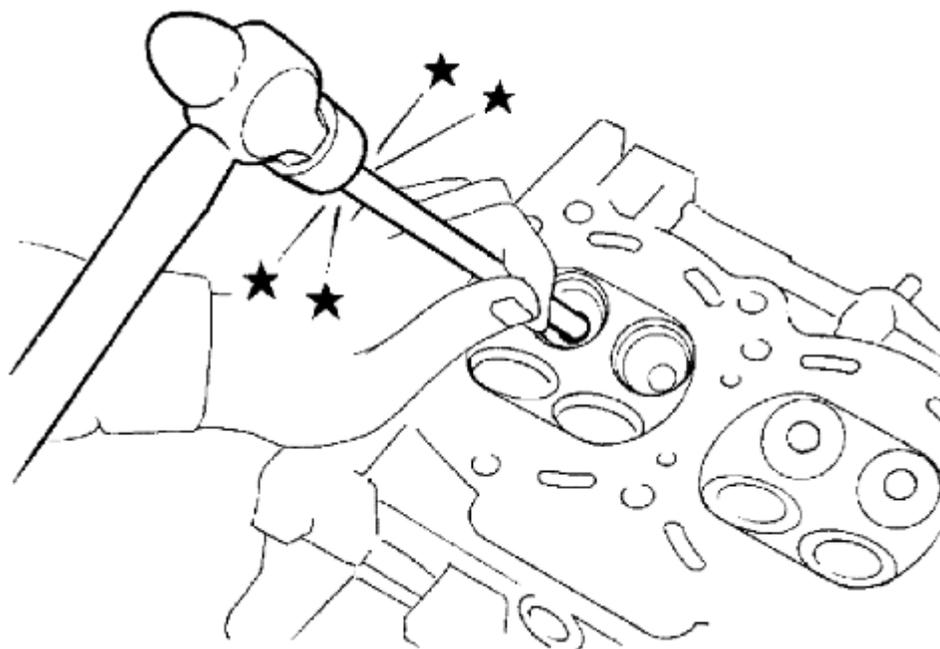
Driving Out Valve Guide Using Press And Suitable Tool
